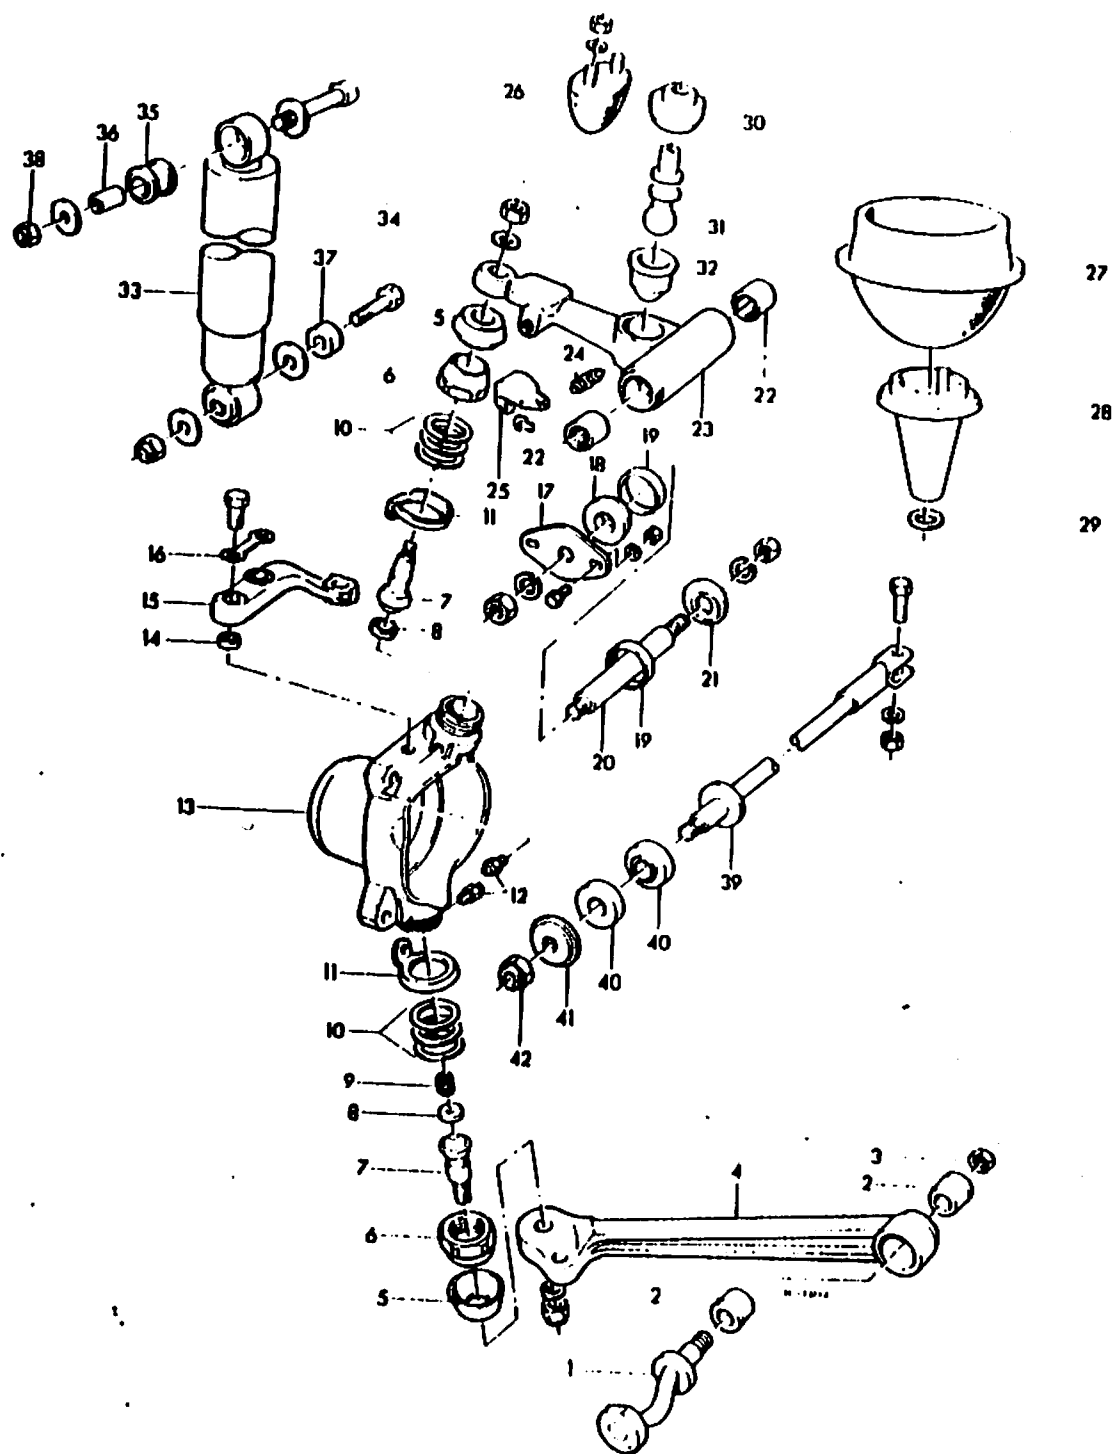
Exploded view of the front suspension - rubber cone spring type (Sec 1)
